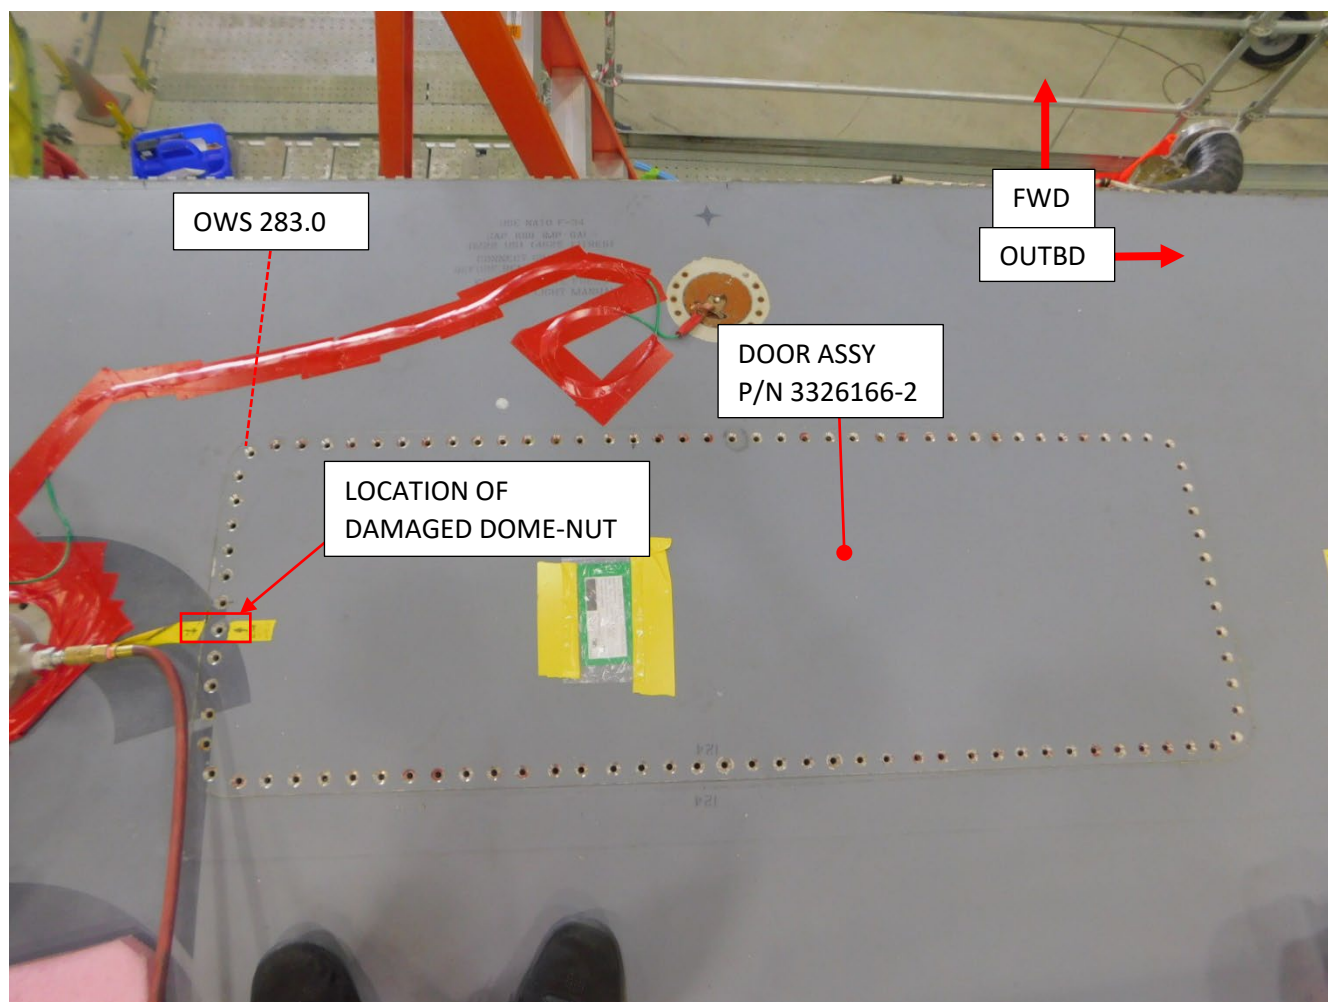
View looking down at location of damaged dome-nut on RH Outer Wing Upper Surface
